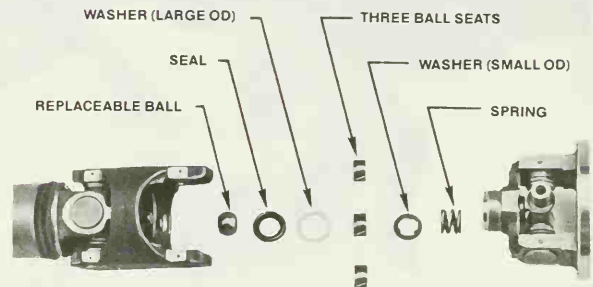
Parts of the centering ball assembly. (GMC Truck and Coach Division of General Motors Corporation)
